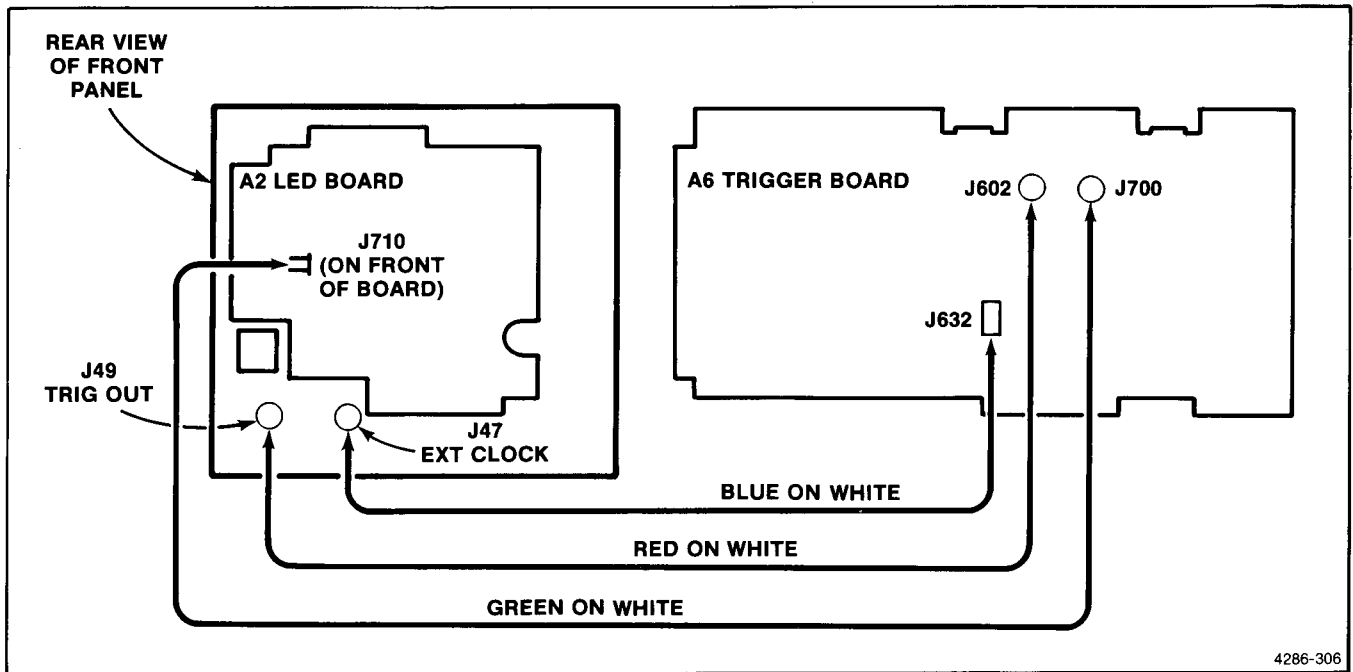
Interconnections between front panel and A6 Trigger Board.
